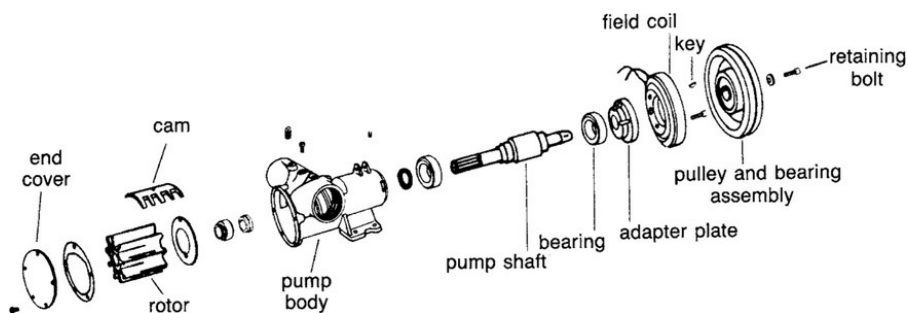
An exploded view of a pump with an electromagnetic clutch.
